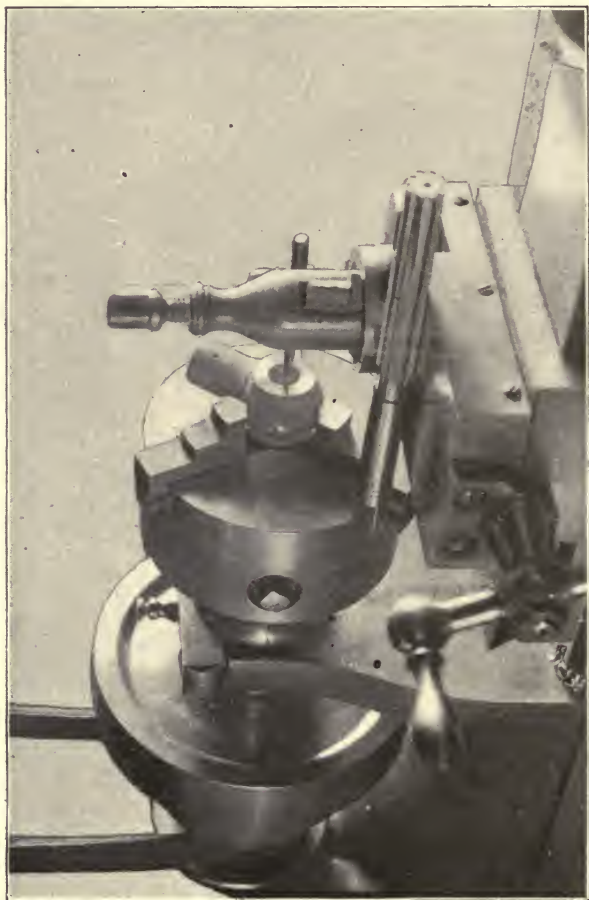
BORING CONNECTING ROD END TO FIT PISTON PIN.
